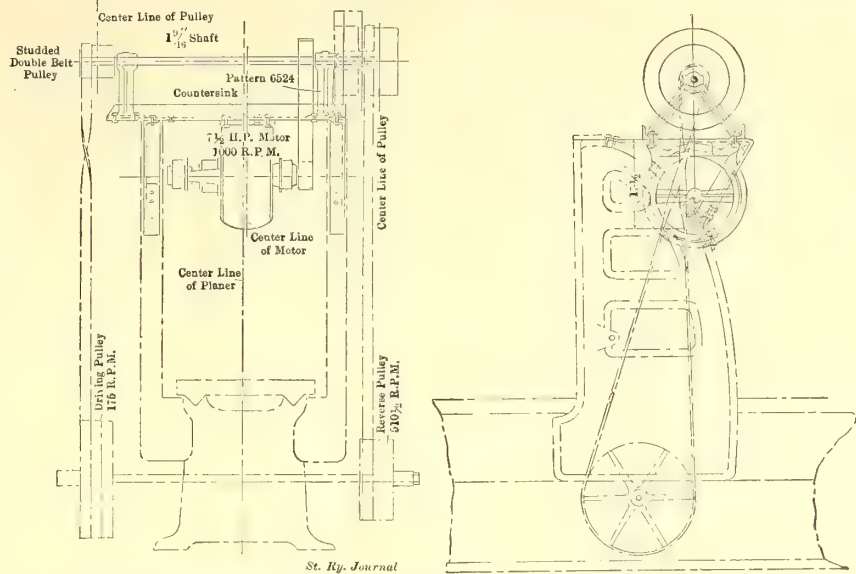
FRONT AND SIDE ELEVATIONS OF PLANER WITH REVISED DRIVE, ILLUSTRATING PARTICULARLY THE MANNER OF MOUNTING THE MOTOR OVER THE BED OF THE MACHINE
